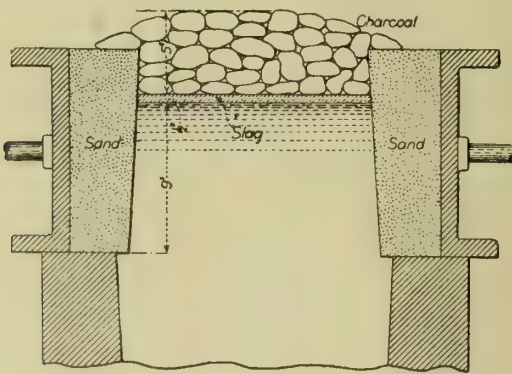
METHOD OF MAKING THE INGOTS. 15IN. MOULD.
